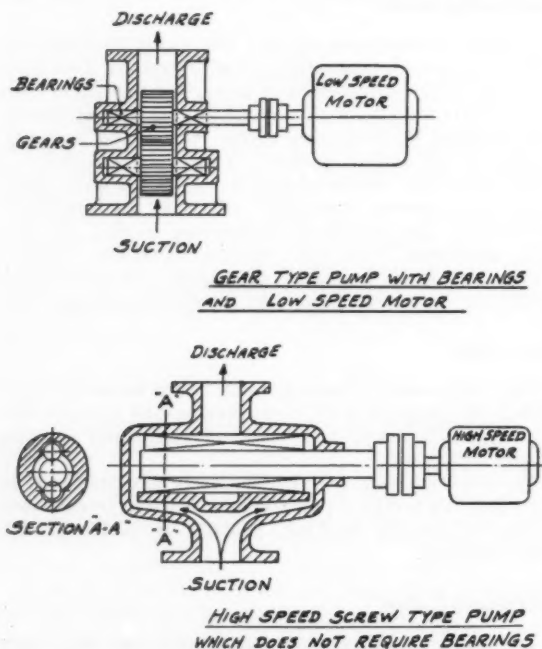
Low-speed motor-driven gear-type pump, and high-speed screw-type pump
